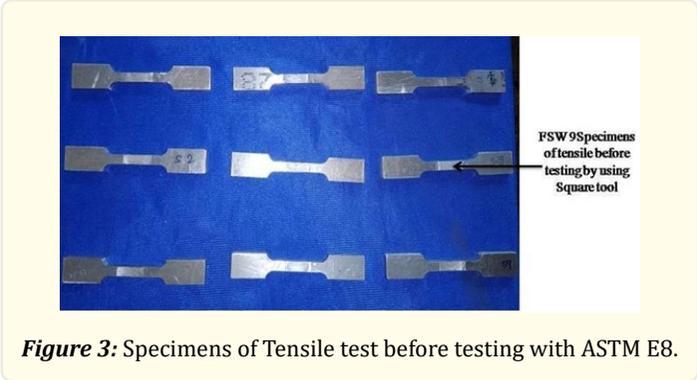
Specimens of Tensile test before testing with ASTM E8.
